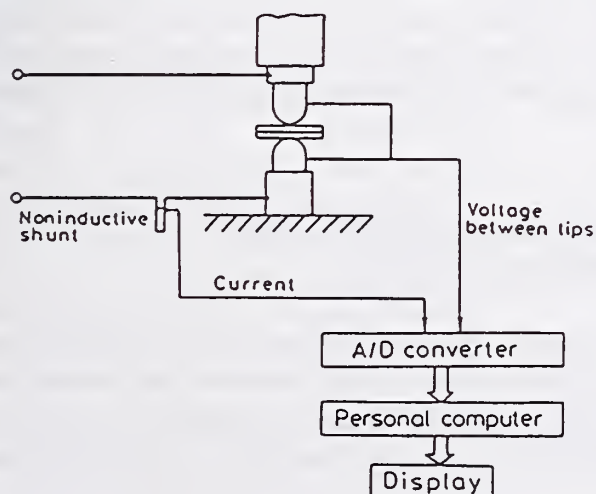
Sensing system used for the measurement of the welding current and voltage between tips
